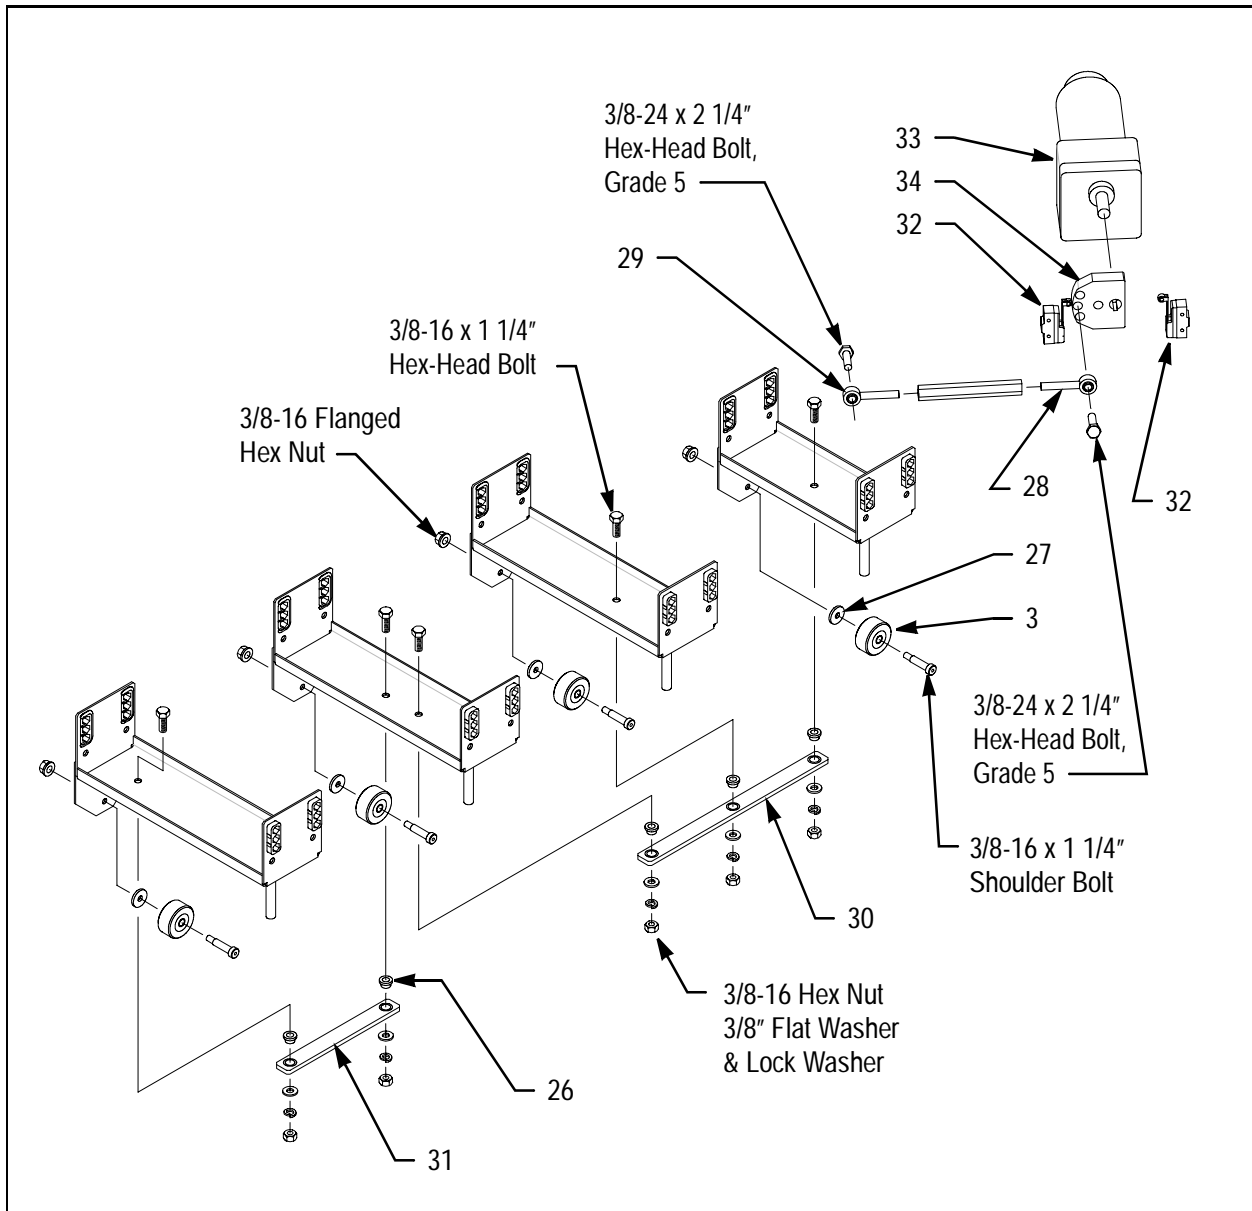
Divert Module – Swivel Mechanism (Shown With Rollers Removed)
